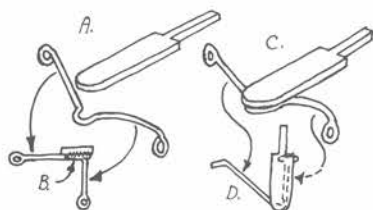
Fabrication of the steering oar brace. A, the bracket is soldered to the wire struts (B); C, the completed assembly in perspective; D, a top view.
